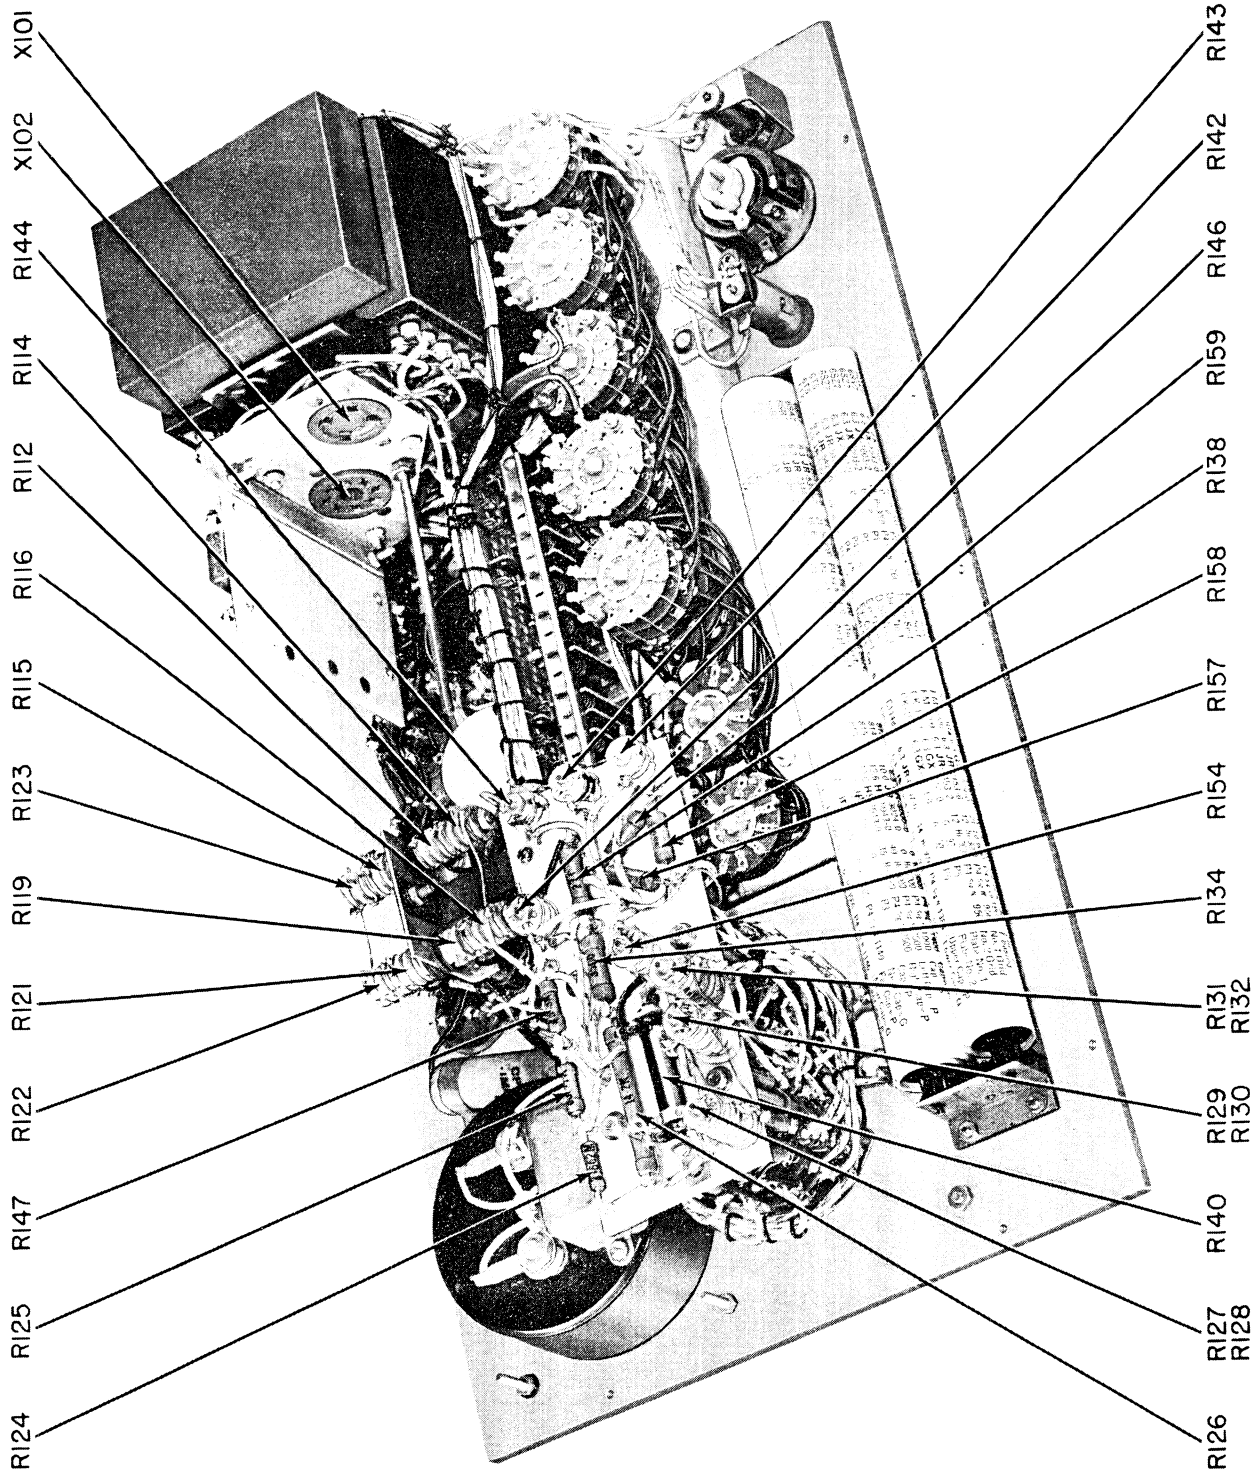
Internal View of Tube Tester TV-3B/U Front Left Oblique
